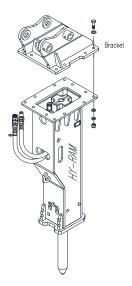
Housing Box, Mounting Bracket & Bolt Set
